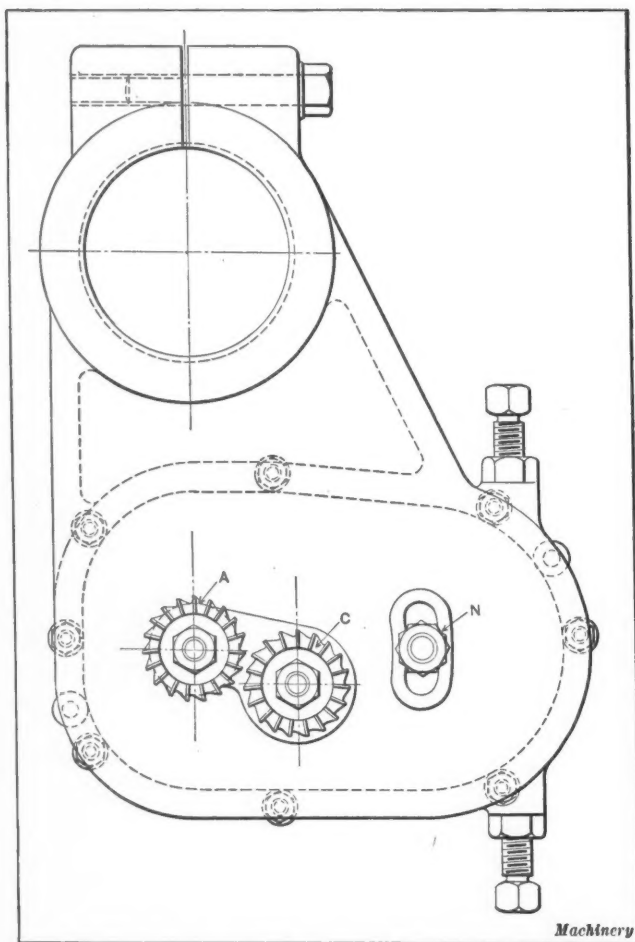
Multiple-spindle Milling Head for Use in splitting Piston-rings
